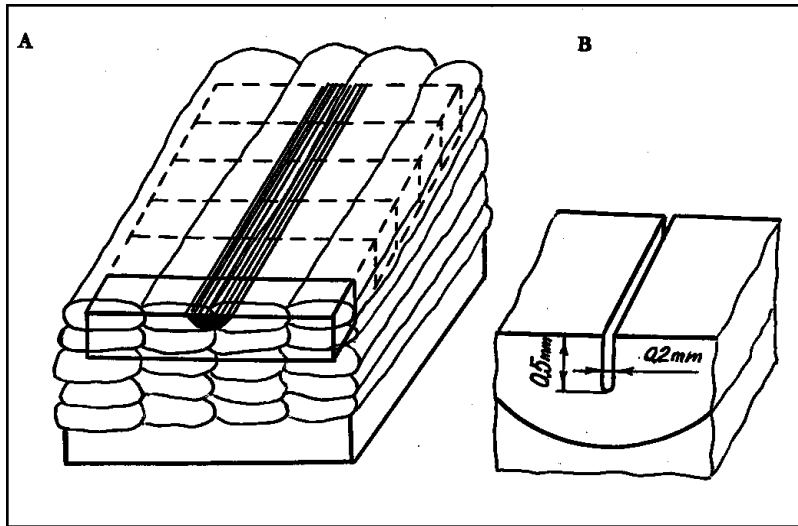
Multipass deposited metal sectioned into specimens for notch bar impact testing (A) and forming of the notch in the specimens (B).
